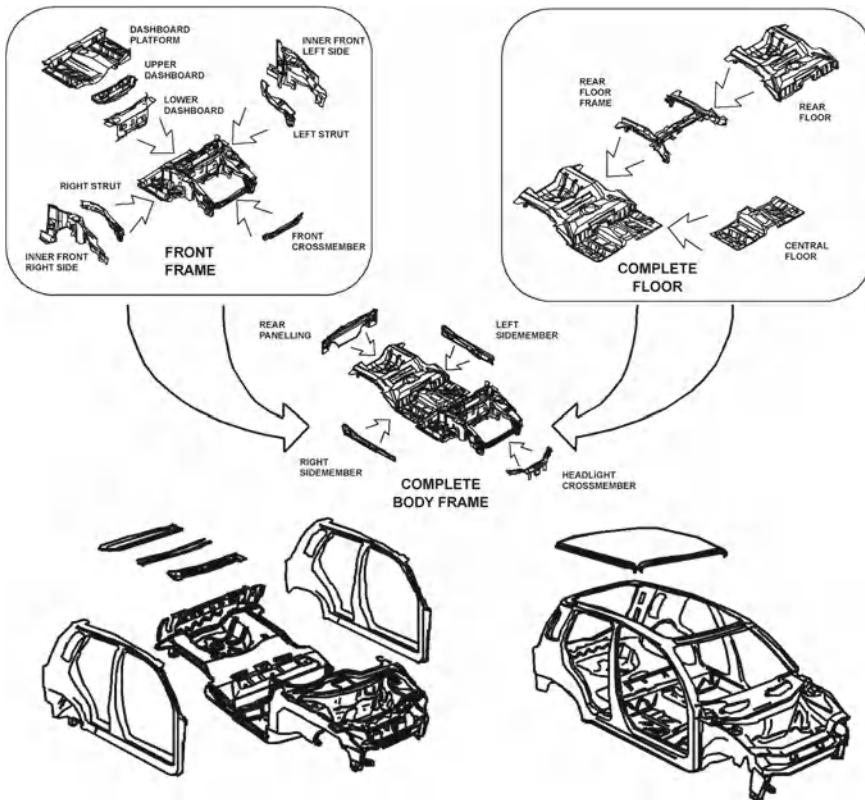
From the body frame to the final unibody assembly (courtesy of Fiat)
